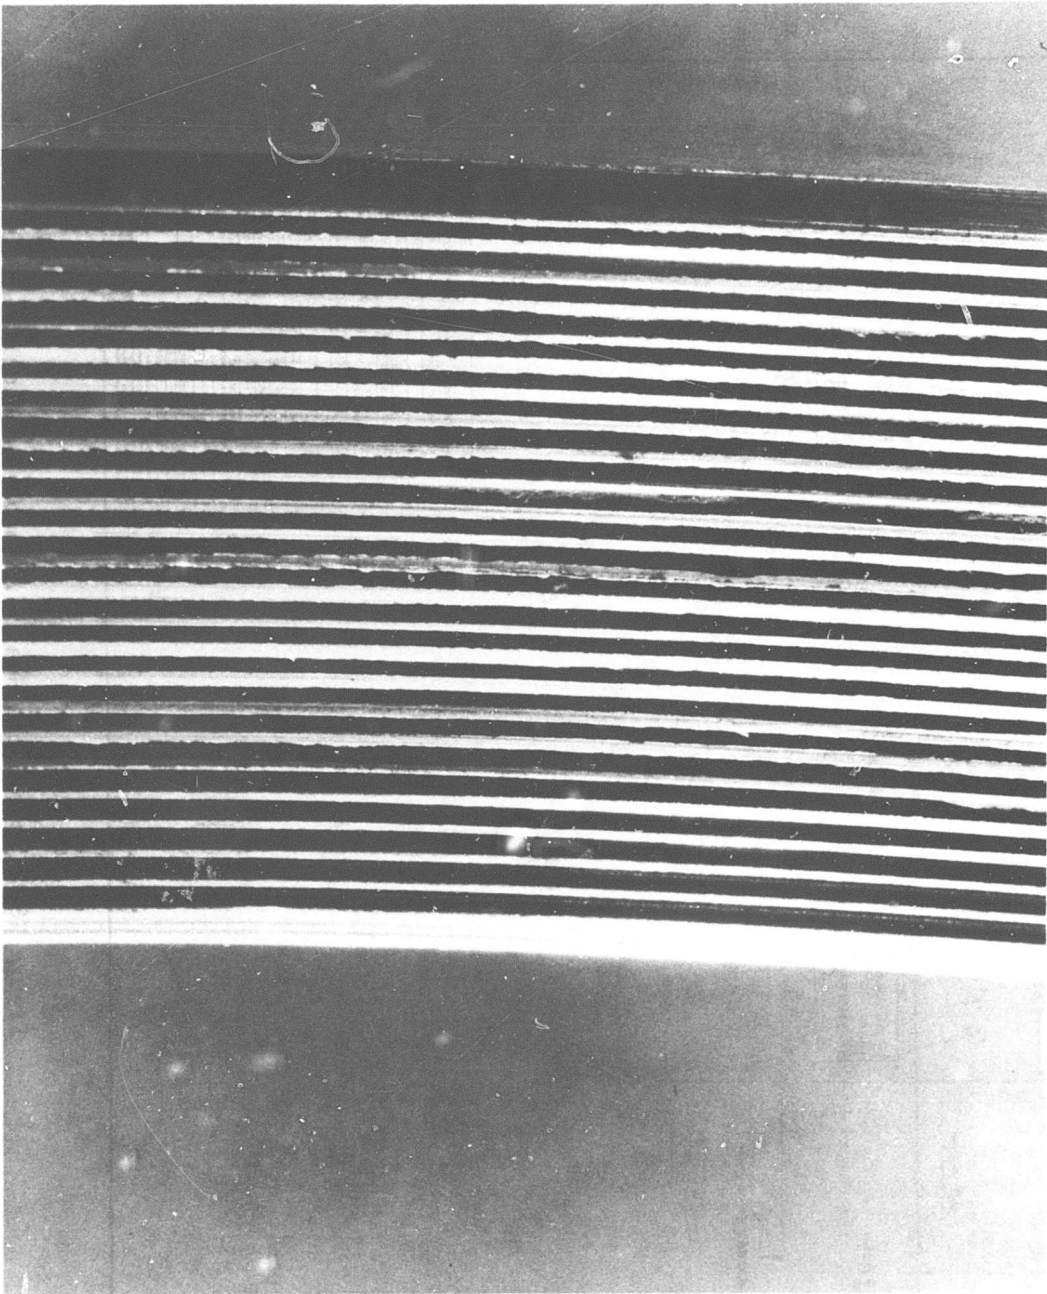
Labyrinth Seal Stationary Component After Misalignment Testing.
